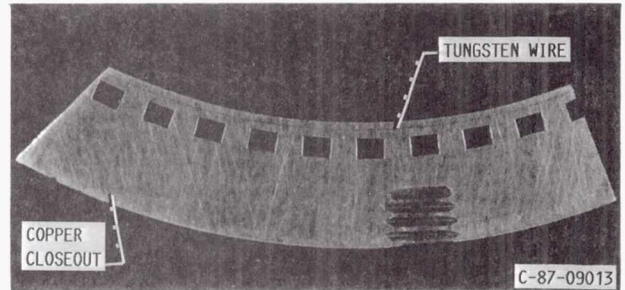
THROAT SECTION OF TUNGSTEN REINFORCED CHAMBER LINER AFTER 400 THERMAL CYCLES.
